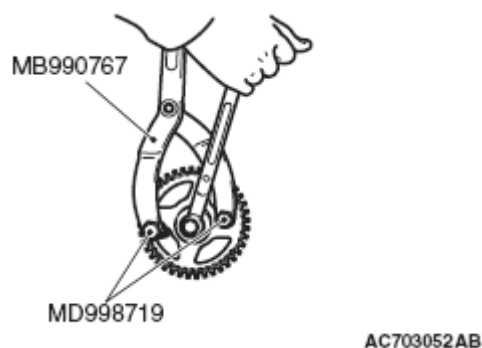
Removing Camshaft Sprocket Using Special Tools MB990767 And MD998719
